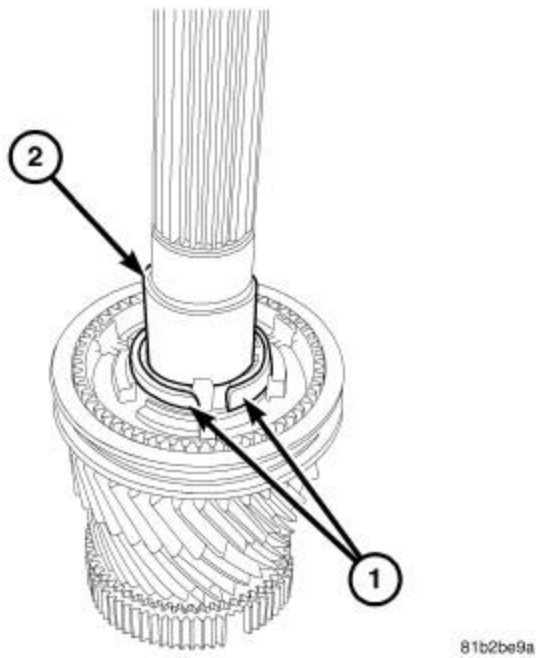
1-2 Synchronizer Hub Split Rings & Mainshaft
